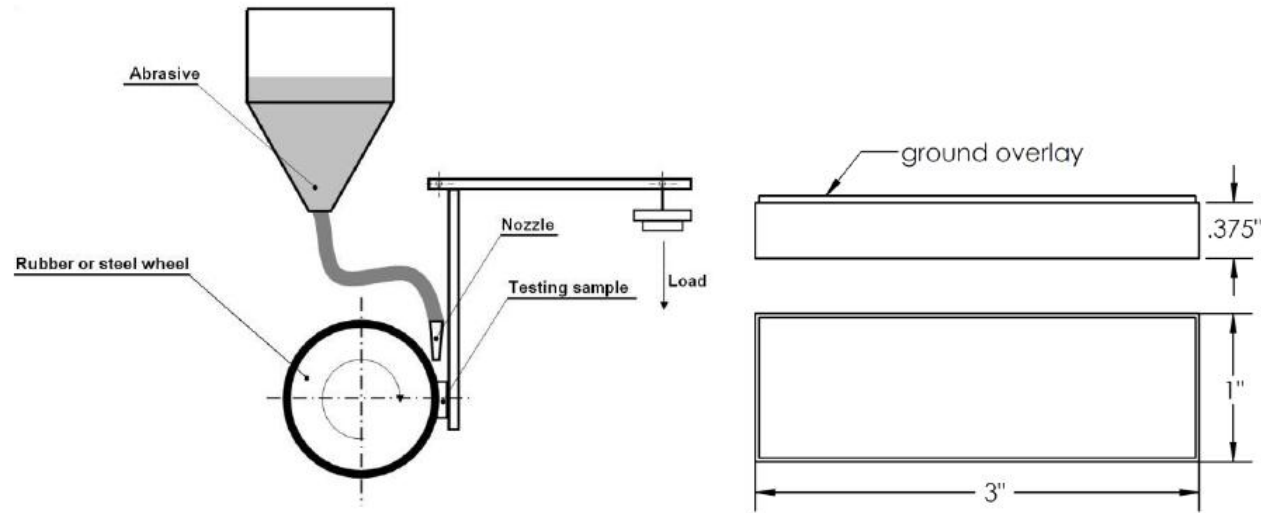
Schematic diagram of ASTM G65 test apparatus (left) and standard test coupon dimensions (right)
